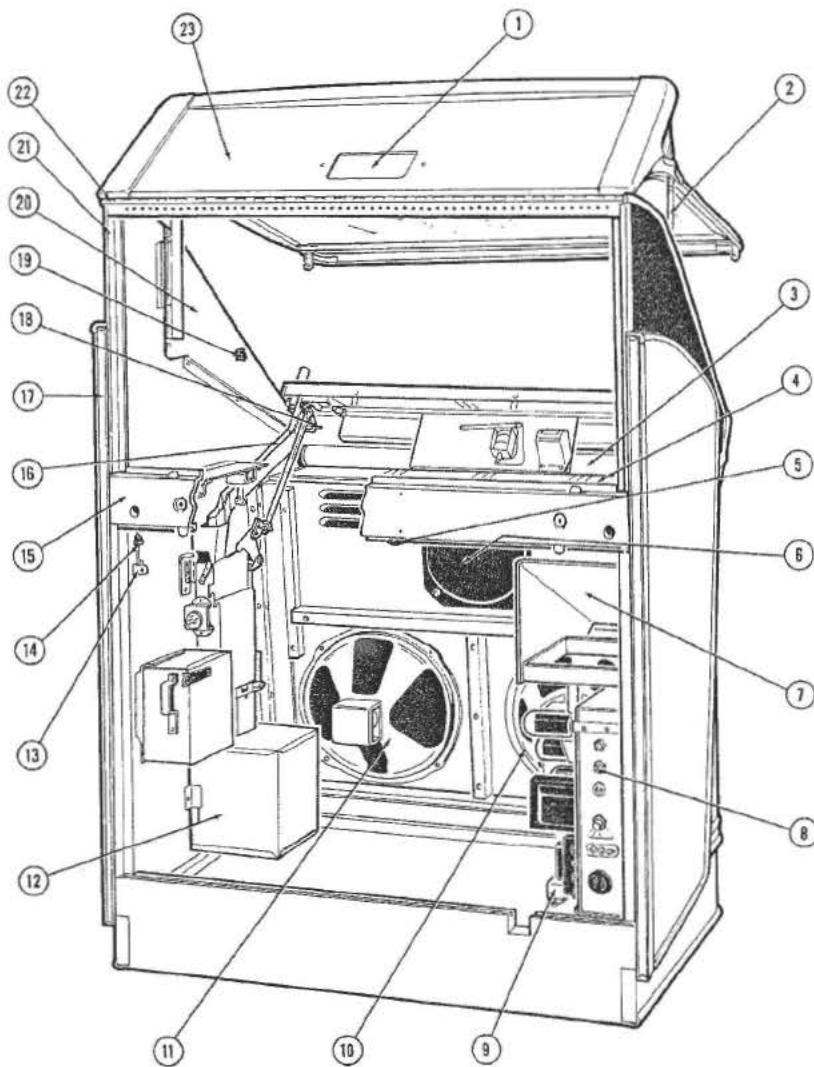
TRIM AND MOUNTING - REAR VIEW
